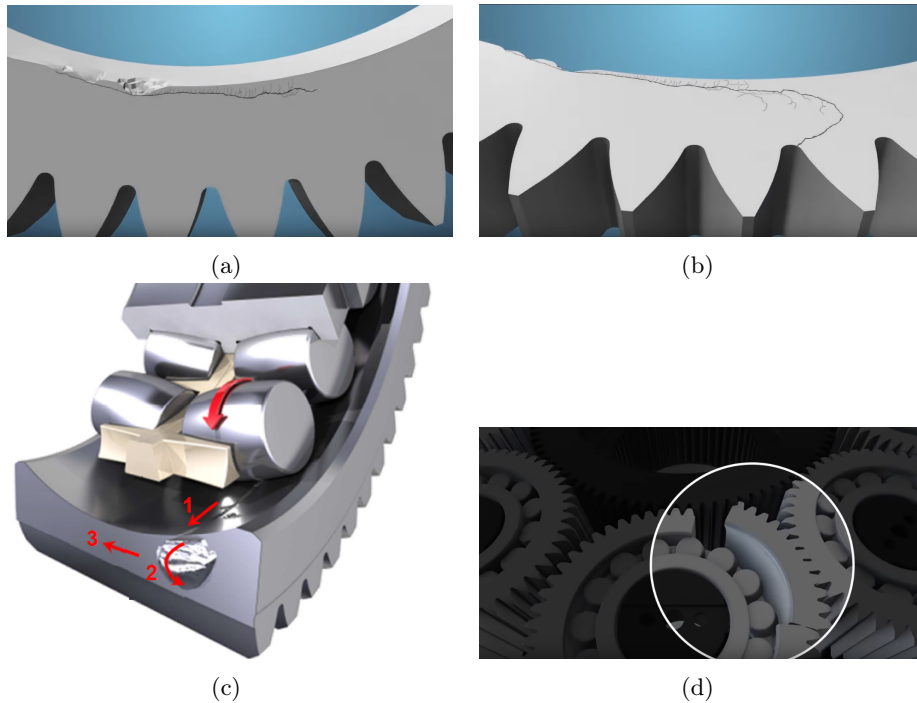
3D representation of: (a) initial crack propagation and spalling, (b) crack penetration through all section leading to failure (c) section-view of crack propagation, (d) resulting failure on gear [2][7]
